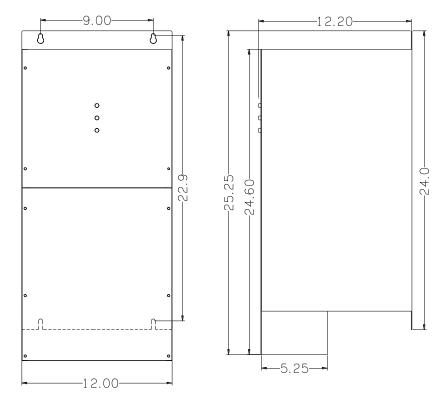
M3712 K14 Chassis Dimensional Outline for 125HP Unit
